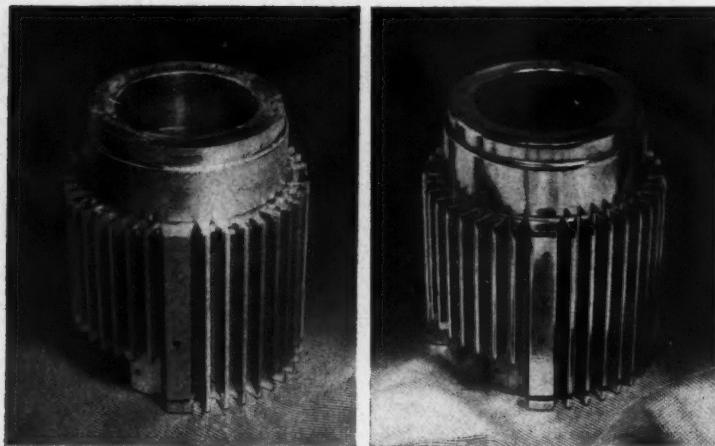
Carbon-steel sprockets before and after being de-burred in a 6-cu. ft., vibratory-finishing machine in a 75-min. cycle. Because of the number processed, one piece is de-burred every 2 sec.
